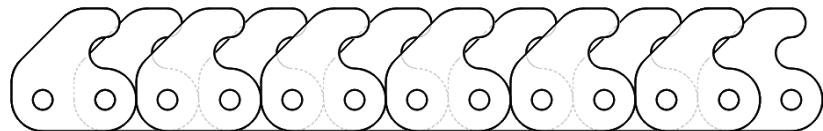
Core geometry used in several part types which locks into the Zipped system.
